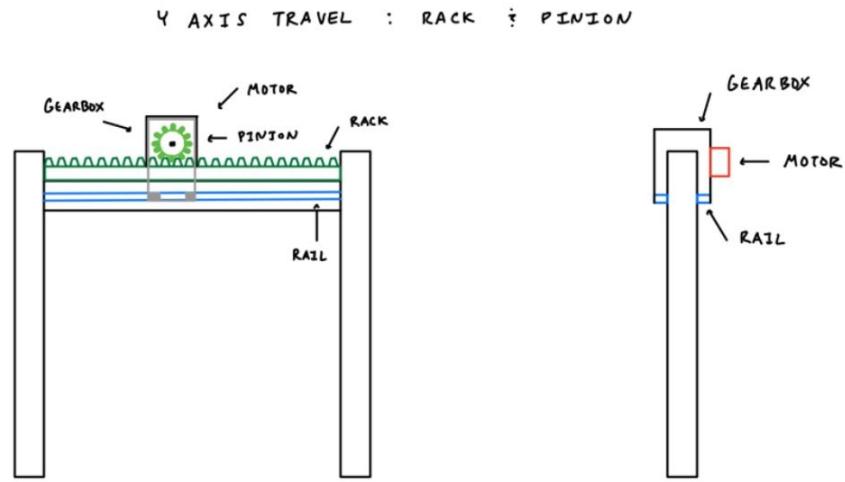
Side view of the Three Rack and Pinion frame, showing a rack and pinion system setup.
